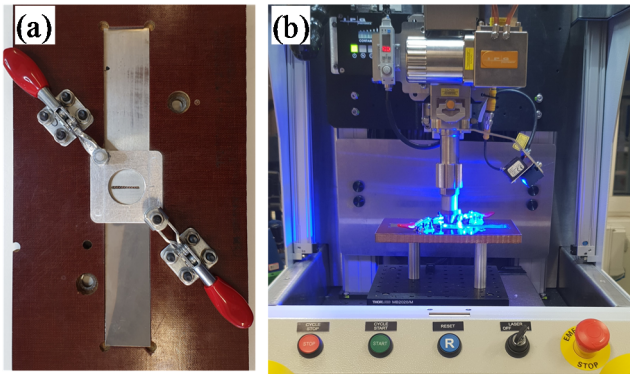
Laser welding (a) fixture to ensure intimate contact, and (b) set-up.
